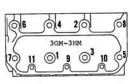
Use appropriate head boit tightening sequence shown above when installing cylinder head.
